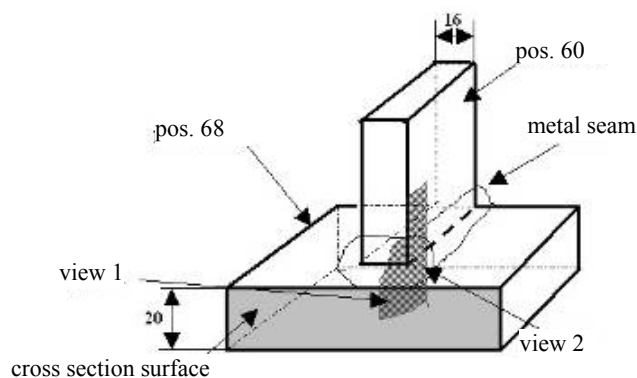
Design scheme of welded joint between the lug (pos. 68) and rib (pos. 60).
